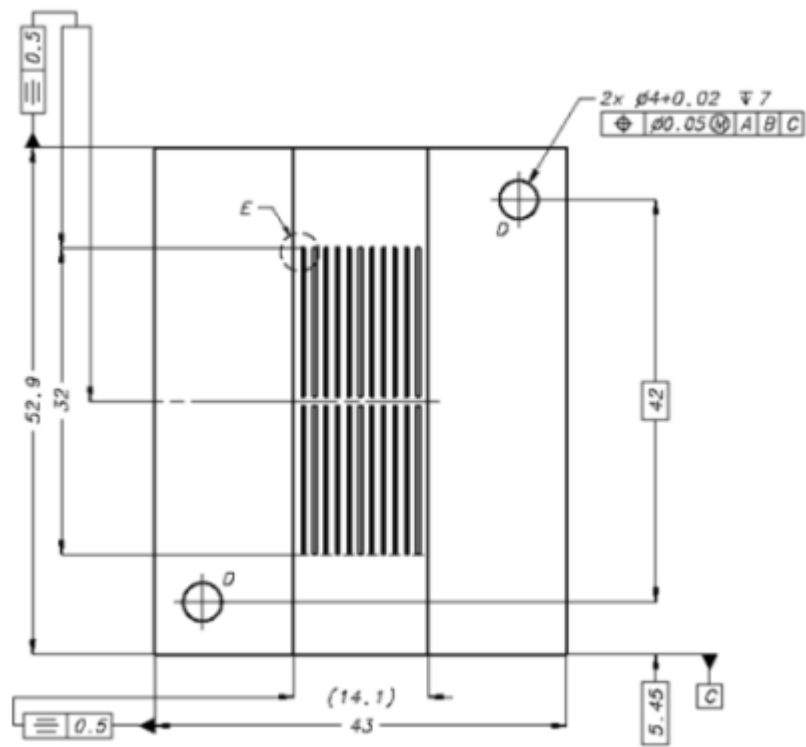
Technical drawings of 900 micron single interrupted channel
